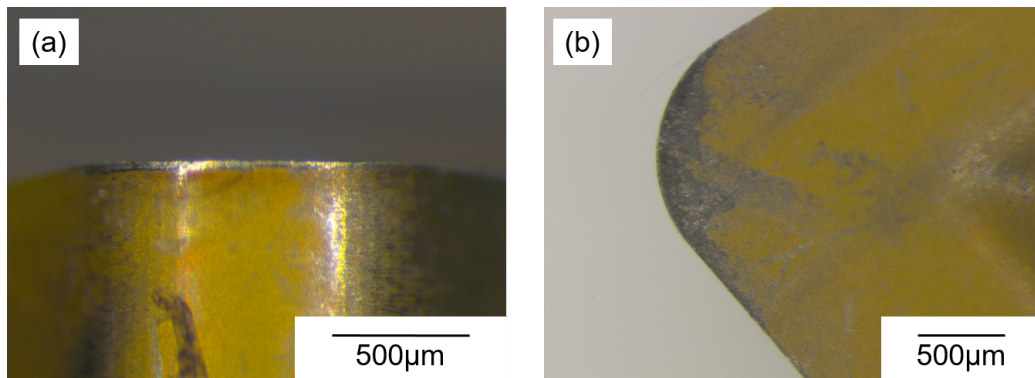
Example tool wear produced during face turning of face 3 on billet 3_1. The tool shown was used during the 1st repeat of face 3. The tool shown is representative of all passes performed on face 3.
